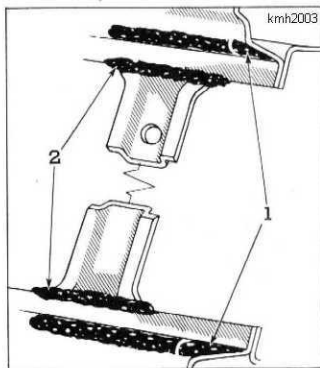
Applying 3-M Autobody Sealer to Windshield Opening
